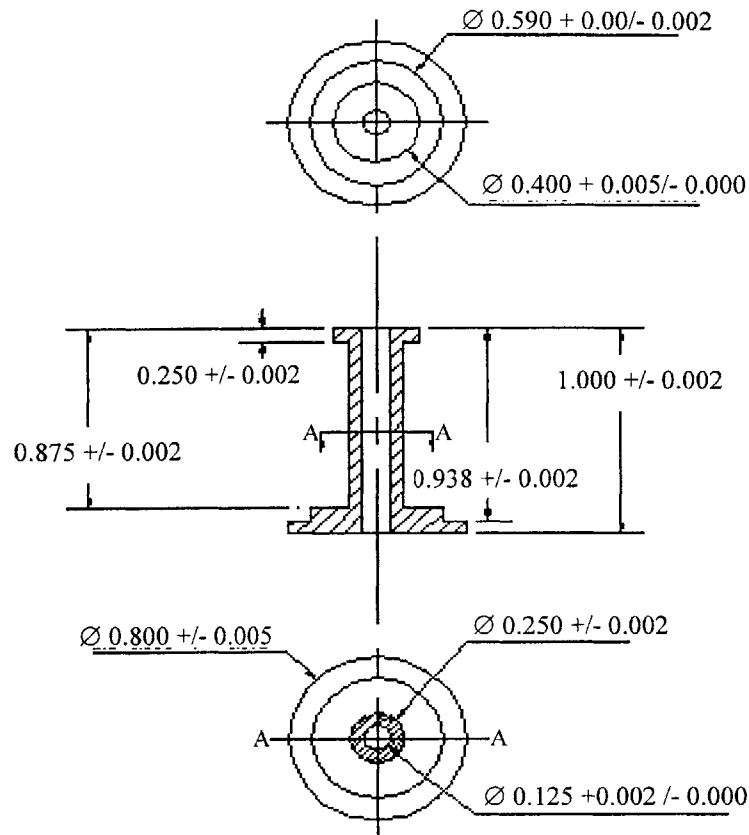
Standard orthographic View of the Inner Compression Spring Platform
